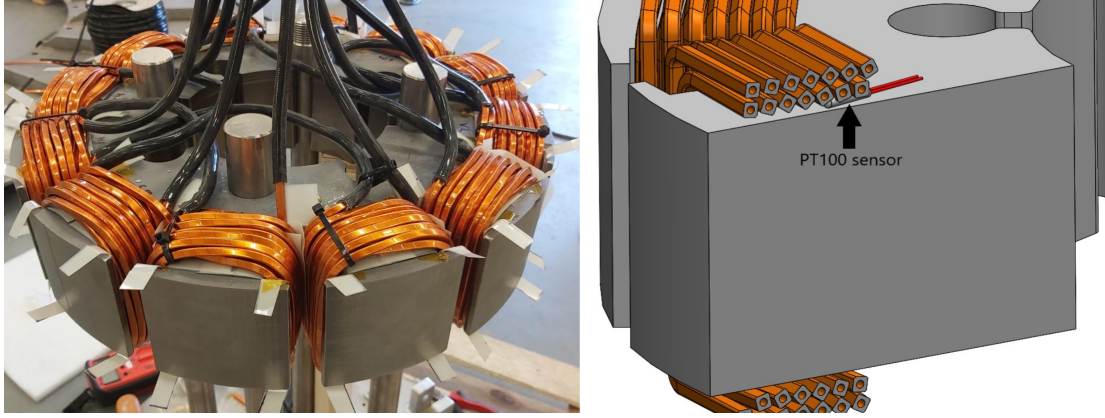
Prototype-2 motor assembly (left) and PT100 locations (right)
